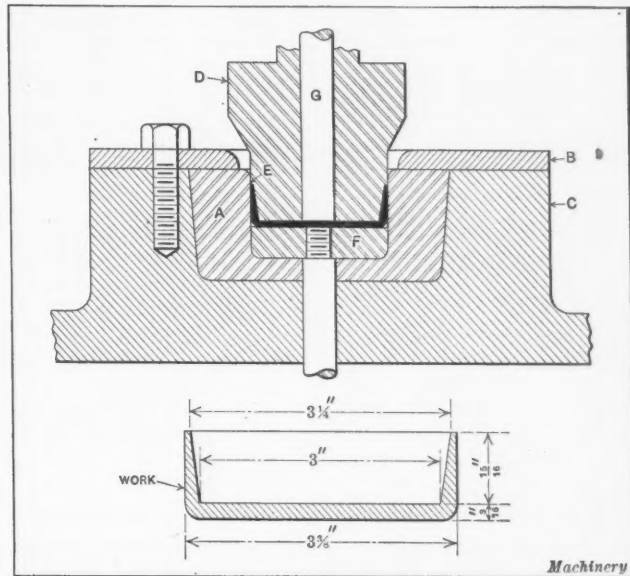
Type of Punch and Die provided on Heavy-duty Punch Presses for the Manufacture of Roller Bearing Races
